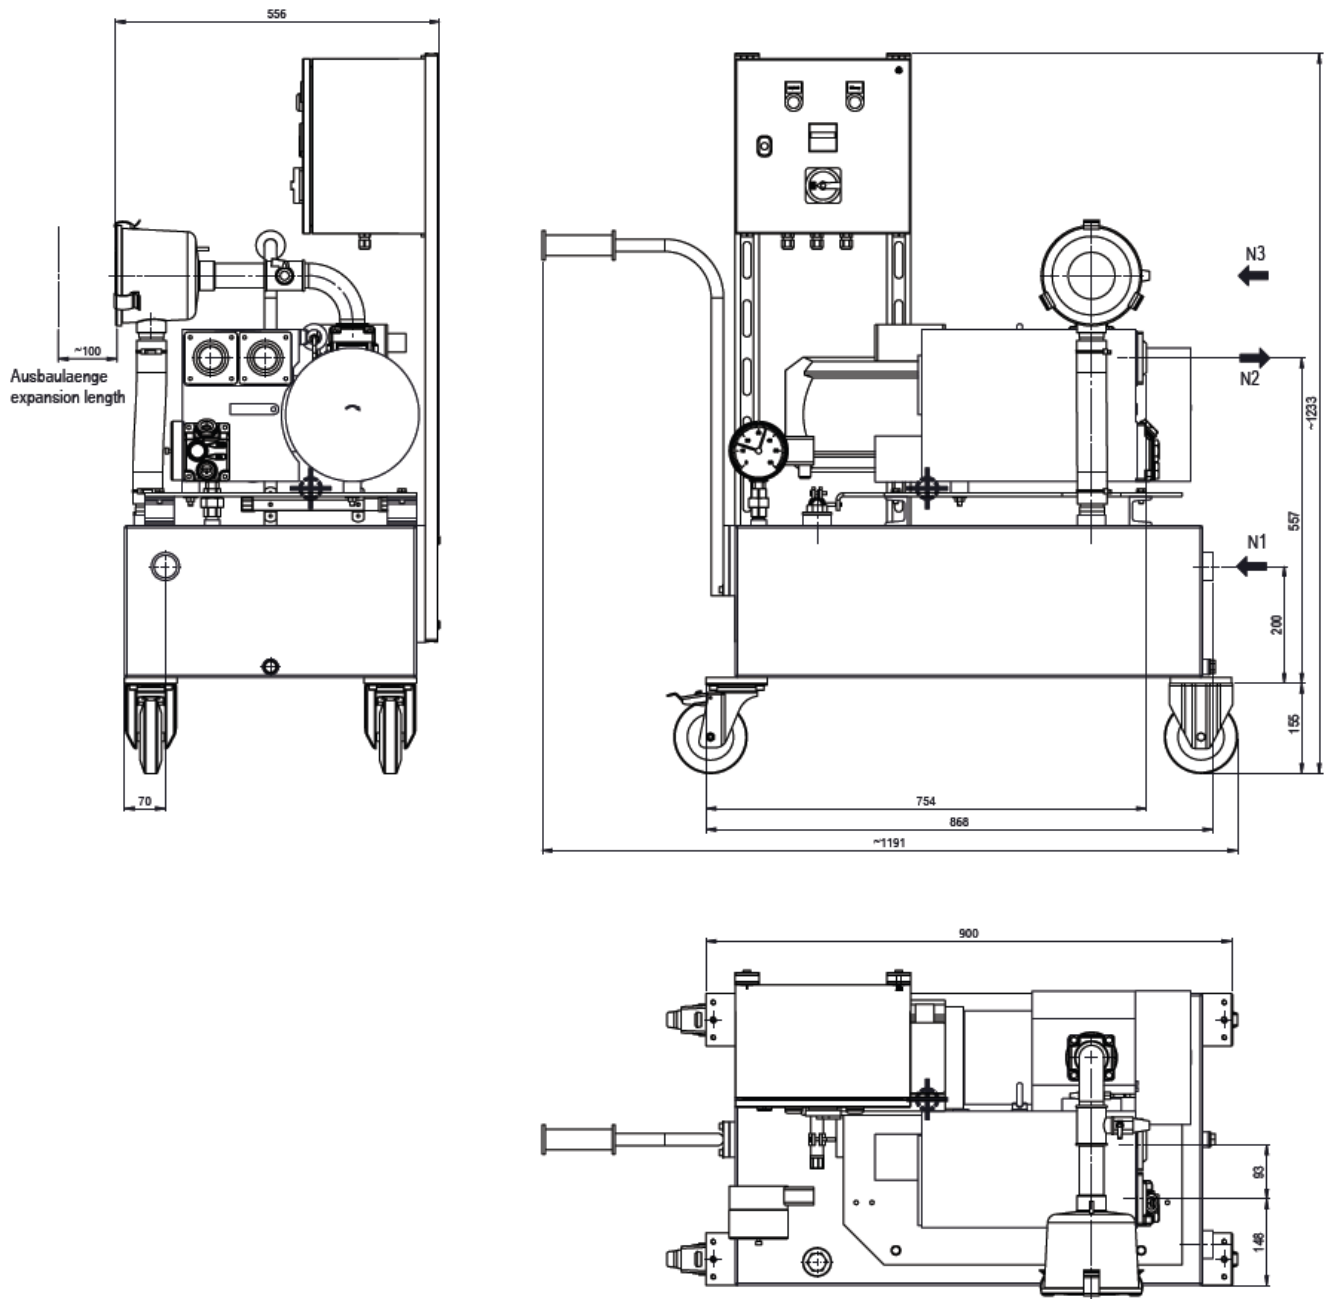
Dimensions vacuum system VD 0100 G AAA TDAX (mobile)
